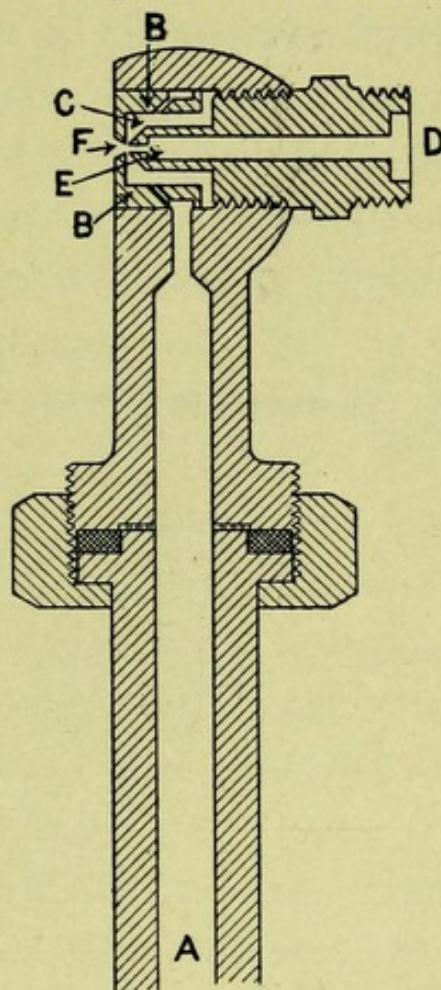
The Ingersoll-Rand Company's Turbo Humidifier. Section of Spray Nozzle.
